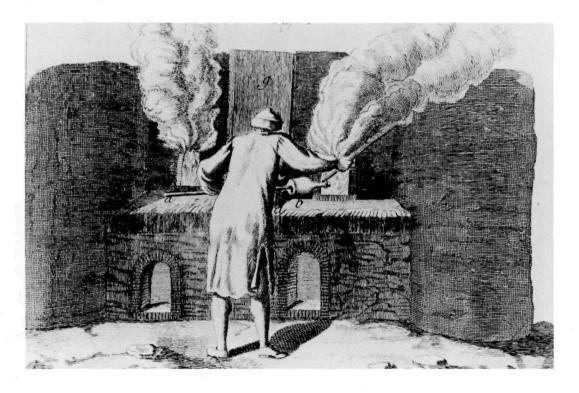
Applying the string rim to the neck of a French liquor bottle with a metal rod. The bottle is still being held on the pontil (Diderot 1772: Pl. VI; RD-37 T).
